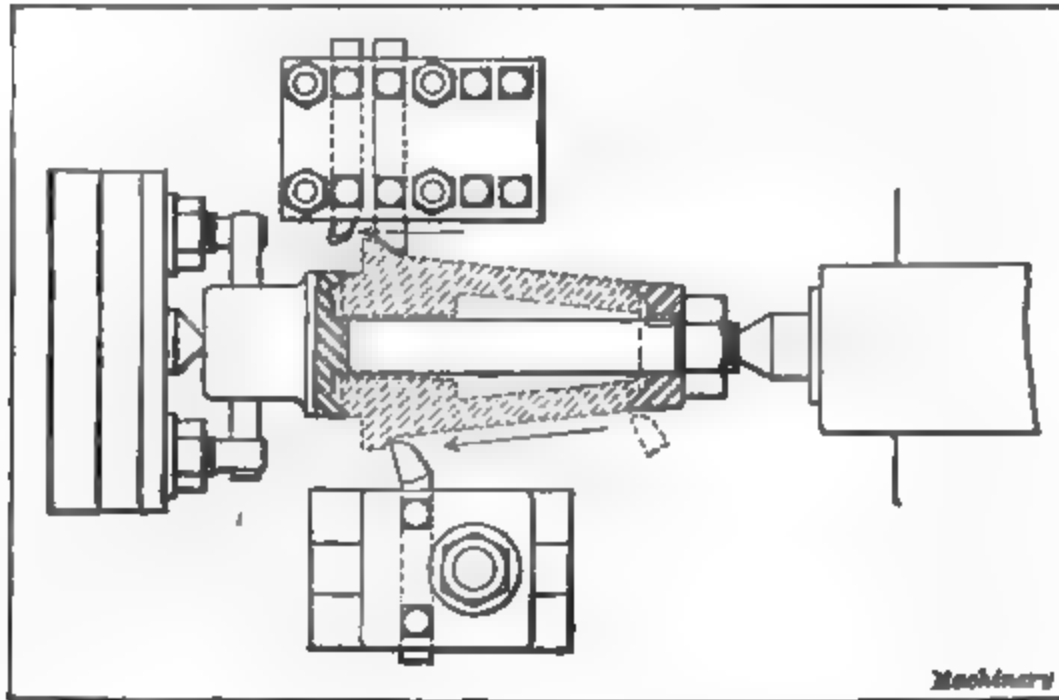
Finishing Tool Arrangement for Bushings shown in Fig. 7
